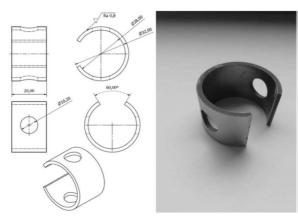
Required dimensions and appearance of the produced C-shaped sample
